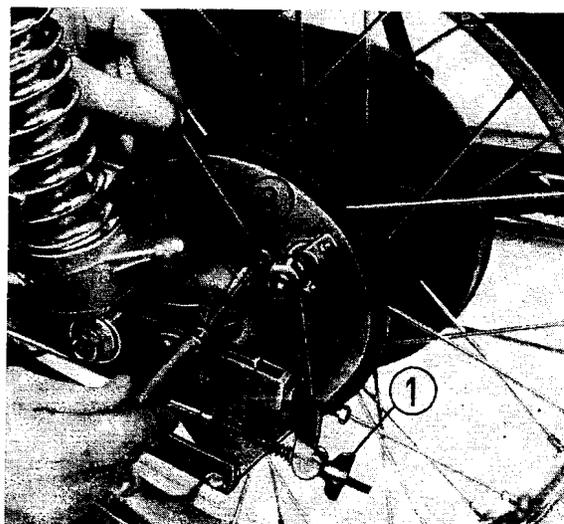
Adjusting the rear wheel brake and stop-light switch
